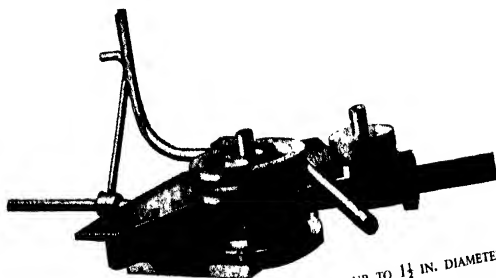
LIGHT-GAUGE-TUBE BENDER FOR TUBES UP TO $1\frac{1}{2}$ IN. DIAMETER
